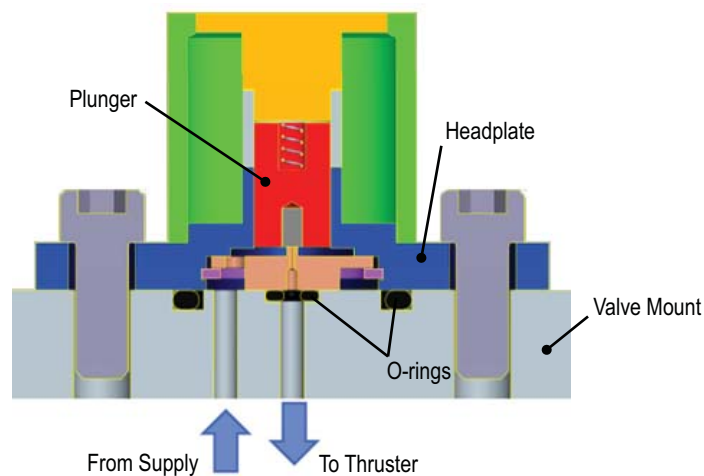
Cross-sectional view of the long-lifetime PGV assembly.
